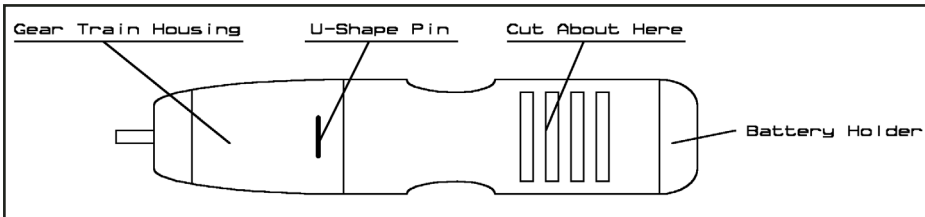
Where to cut the screwdriver and to find the U-shaped pin.
